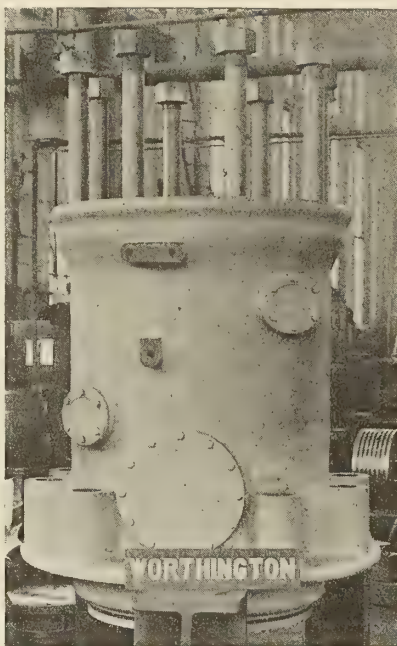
Cylinder; Weight, Including Liner, 9,000 Pounds
